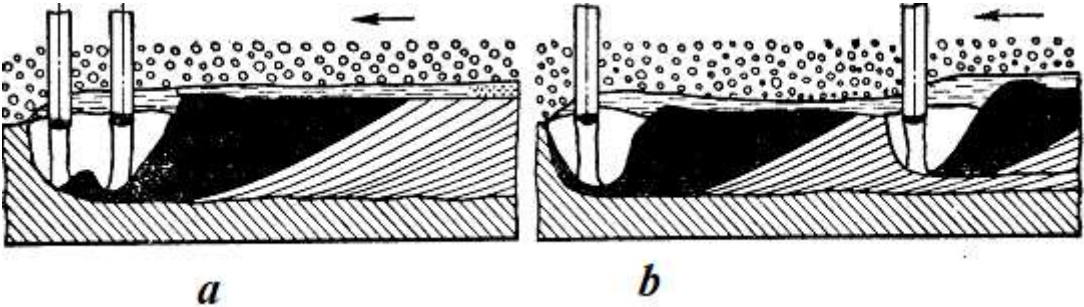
Submerged arc welding with two arcs (the arrow shows the welding direction):
